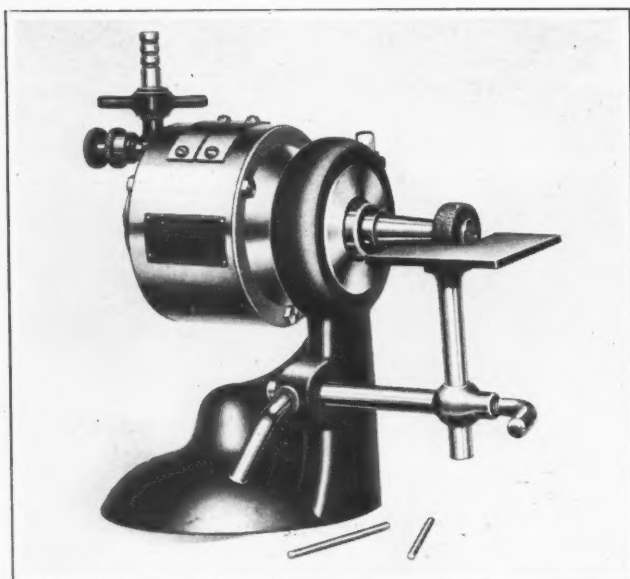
Bench Stand for Pneumatic Grinding Turbine made by the Onsrud Machine Works, Inc.
